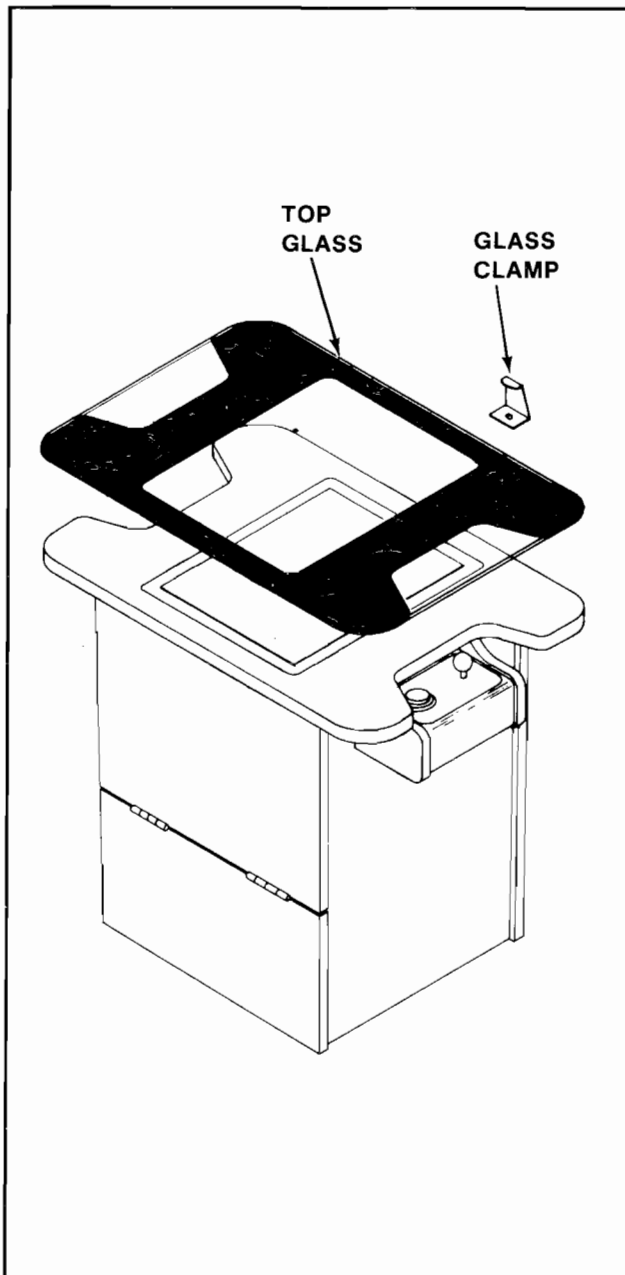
Removing the Top Glass & T.V. Bezel — Cocktail
